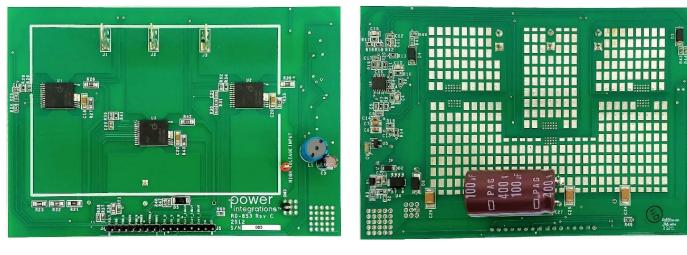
Triangular PCB Configuration Board (125 mm x 85 mm).
